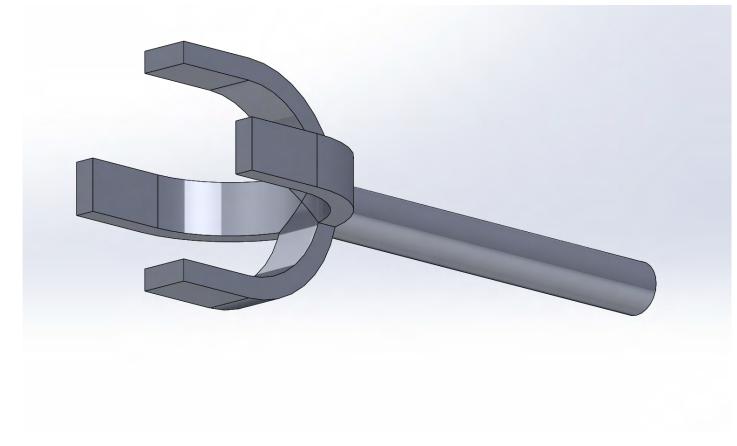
Initial Valve Connector SOLIDWORKS Design
